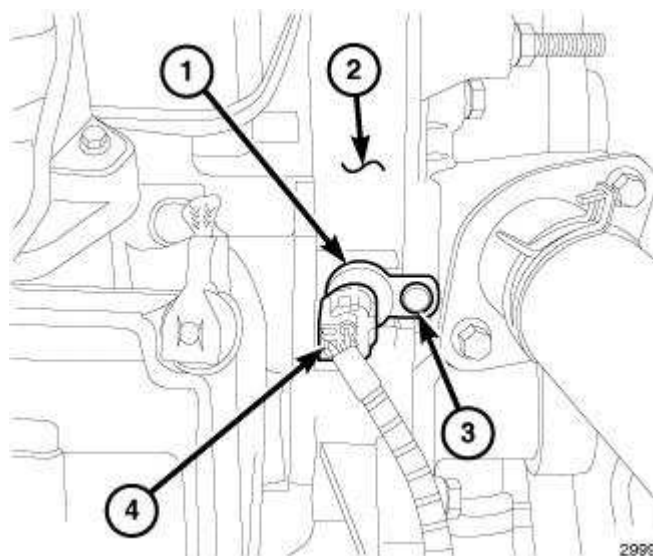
CAMSHAFT POSITION SENSOR-5.7L
